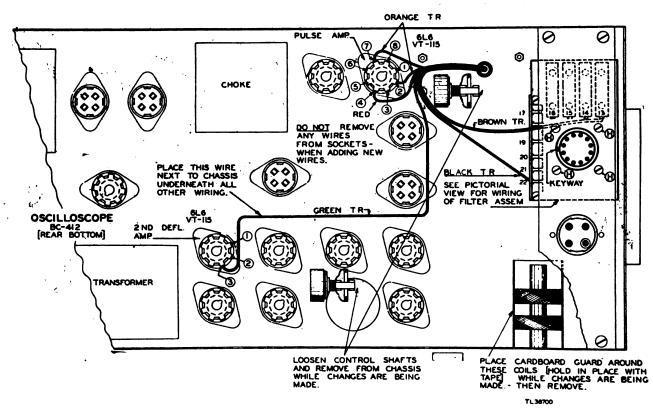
Bottom view of wiring changes on Oscilloscope BC-412.
